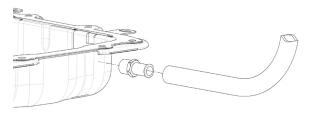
e: Attach Oil Drain Hose To Oil Drain Fitting On Oil Pan
